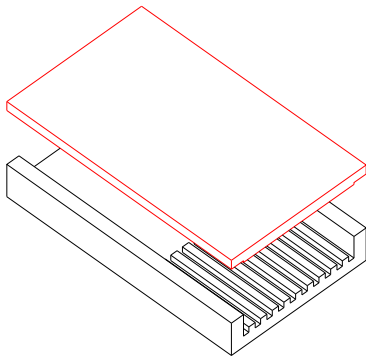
The nozzle manifold used for helium gas puffing.
